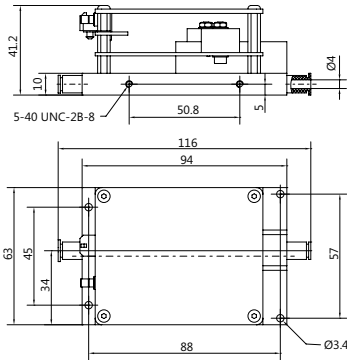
Outline drawing of DPS series driver with general purpose pad
